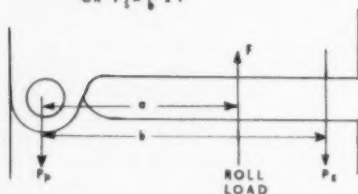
(below).—Method of calculating the forces on the pivot pin and adjusting screw in a Hinge mill
